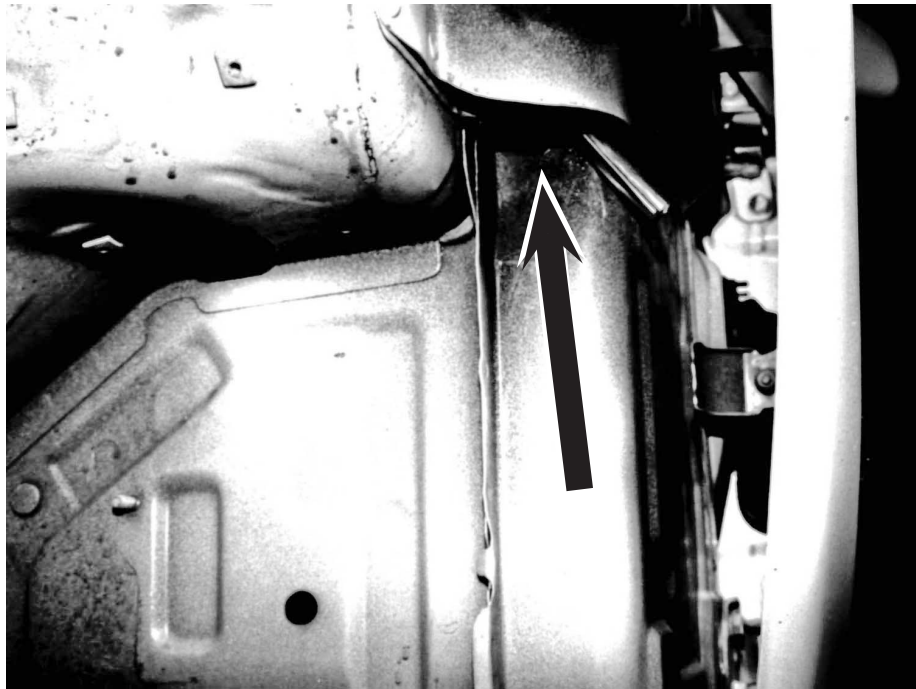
Inside Left Front Wheel Well - Access Hole Location
